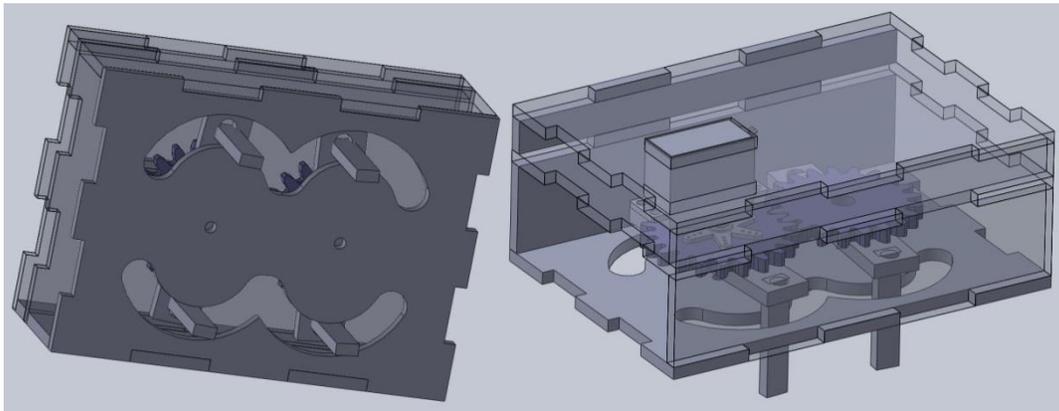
SolidWorks models of our final design, the holes at the bottom plate are extended for a full half-circle motion of the feet.
